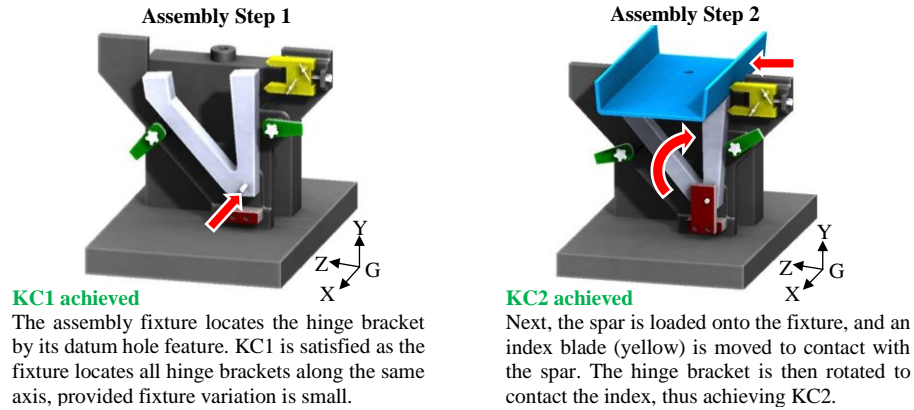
Assembly technique, including the achievement of KC1 and KC2.
